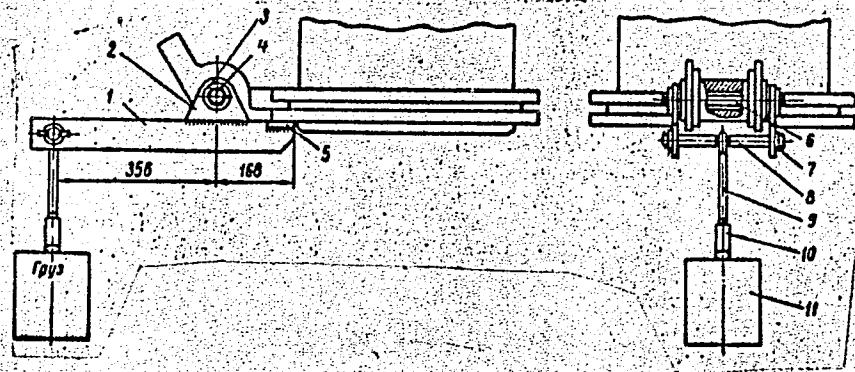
Schematic drawing of equipment for balancing the lower lid of a vacuum device
